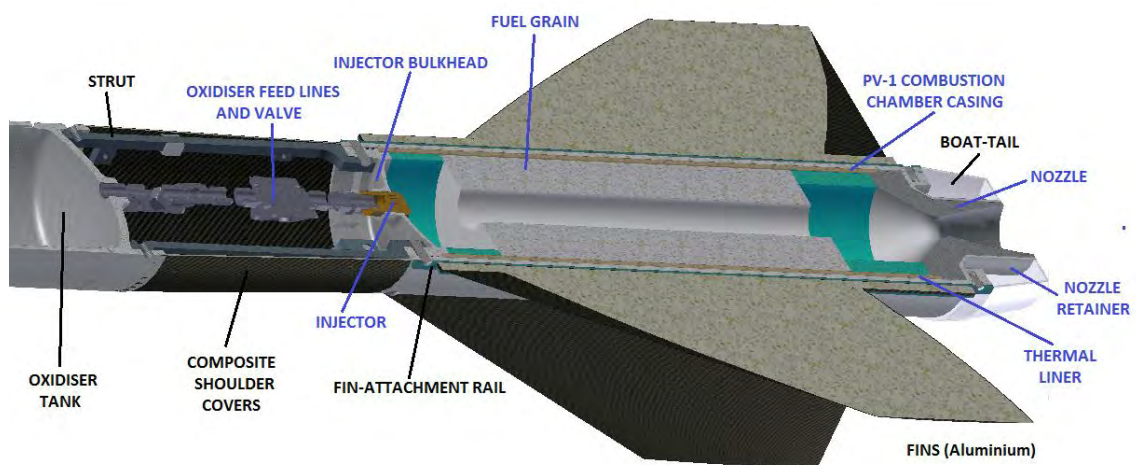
CAD assembly cutaway rendition of the rear end of the Phoenix-1A, showing major structural components.
